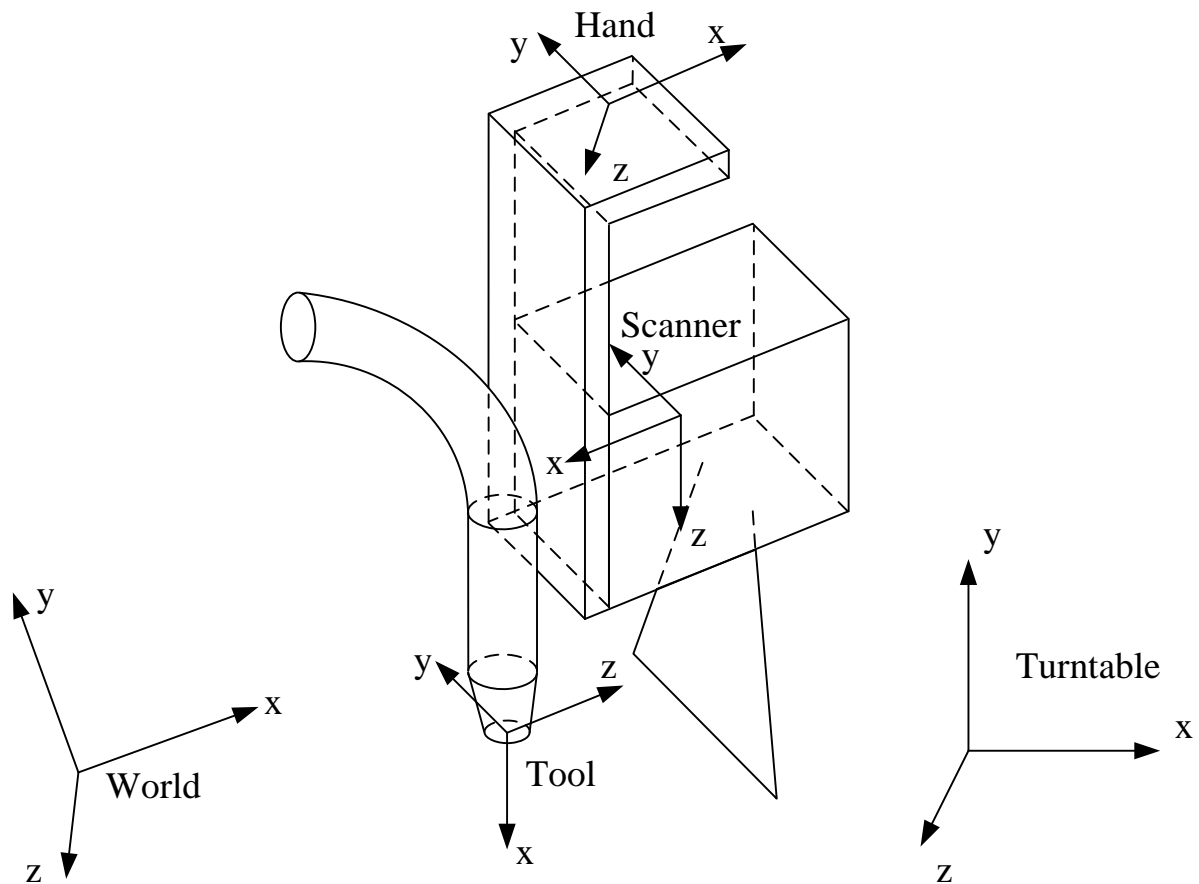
Frames for world, turntable, tool, scanner, and hand. The hand frame of the robot is fixed to the tool fixture where the laser scanner with the scanner frame and welding torch with the tool frame are mounted.
